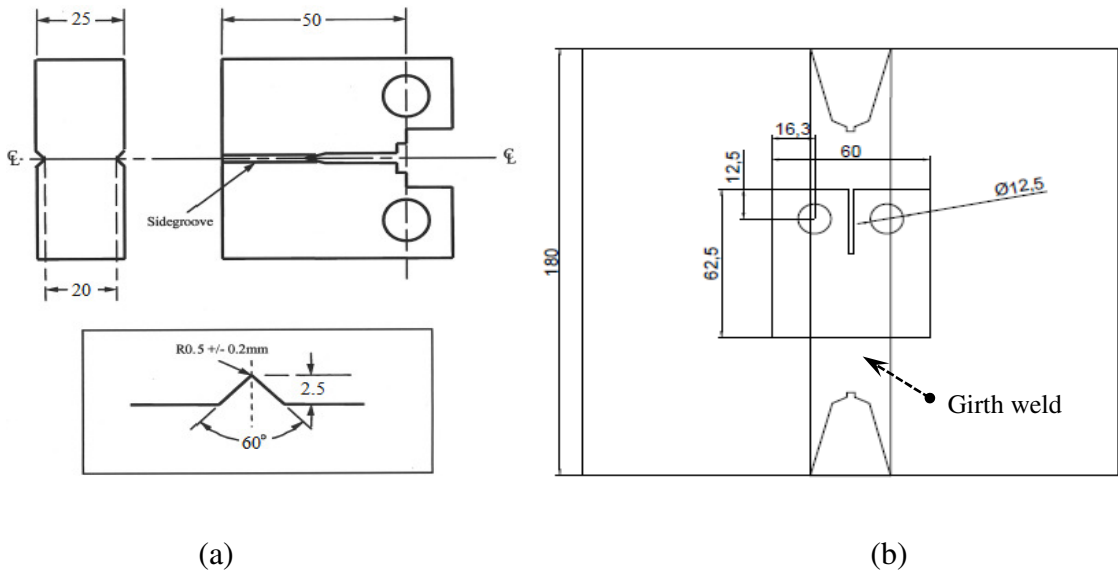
(a) Geometry and dimensions of side-grooved CT specimen and (b) cutting profile for extracting the side-grooved CT specimen blank from MU-5 pipe (dimensions are in millimetres).
